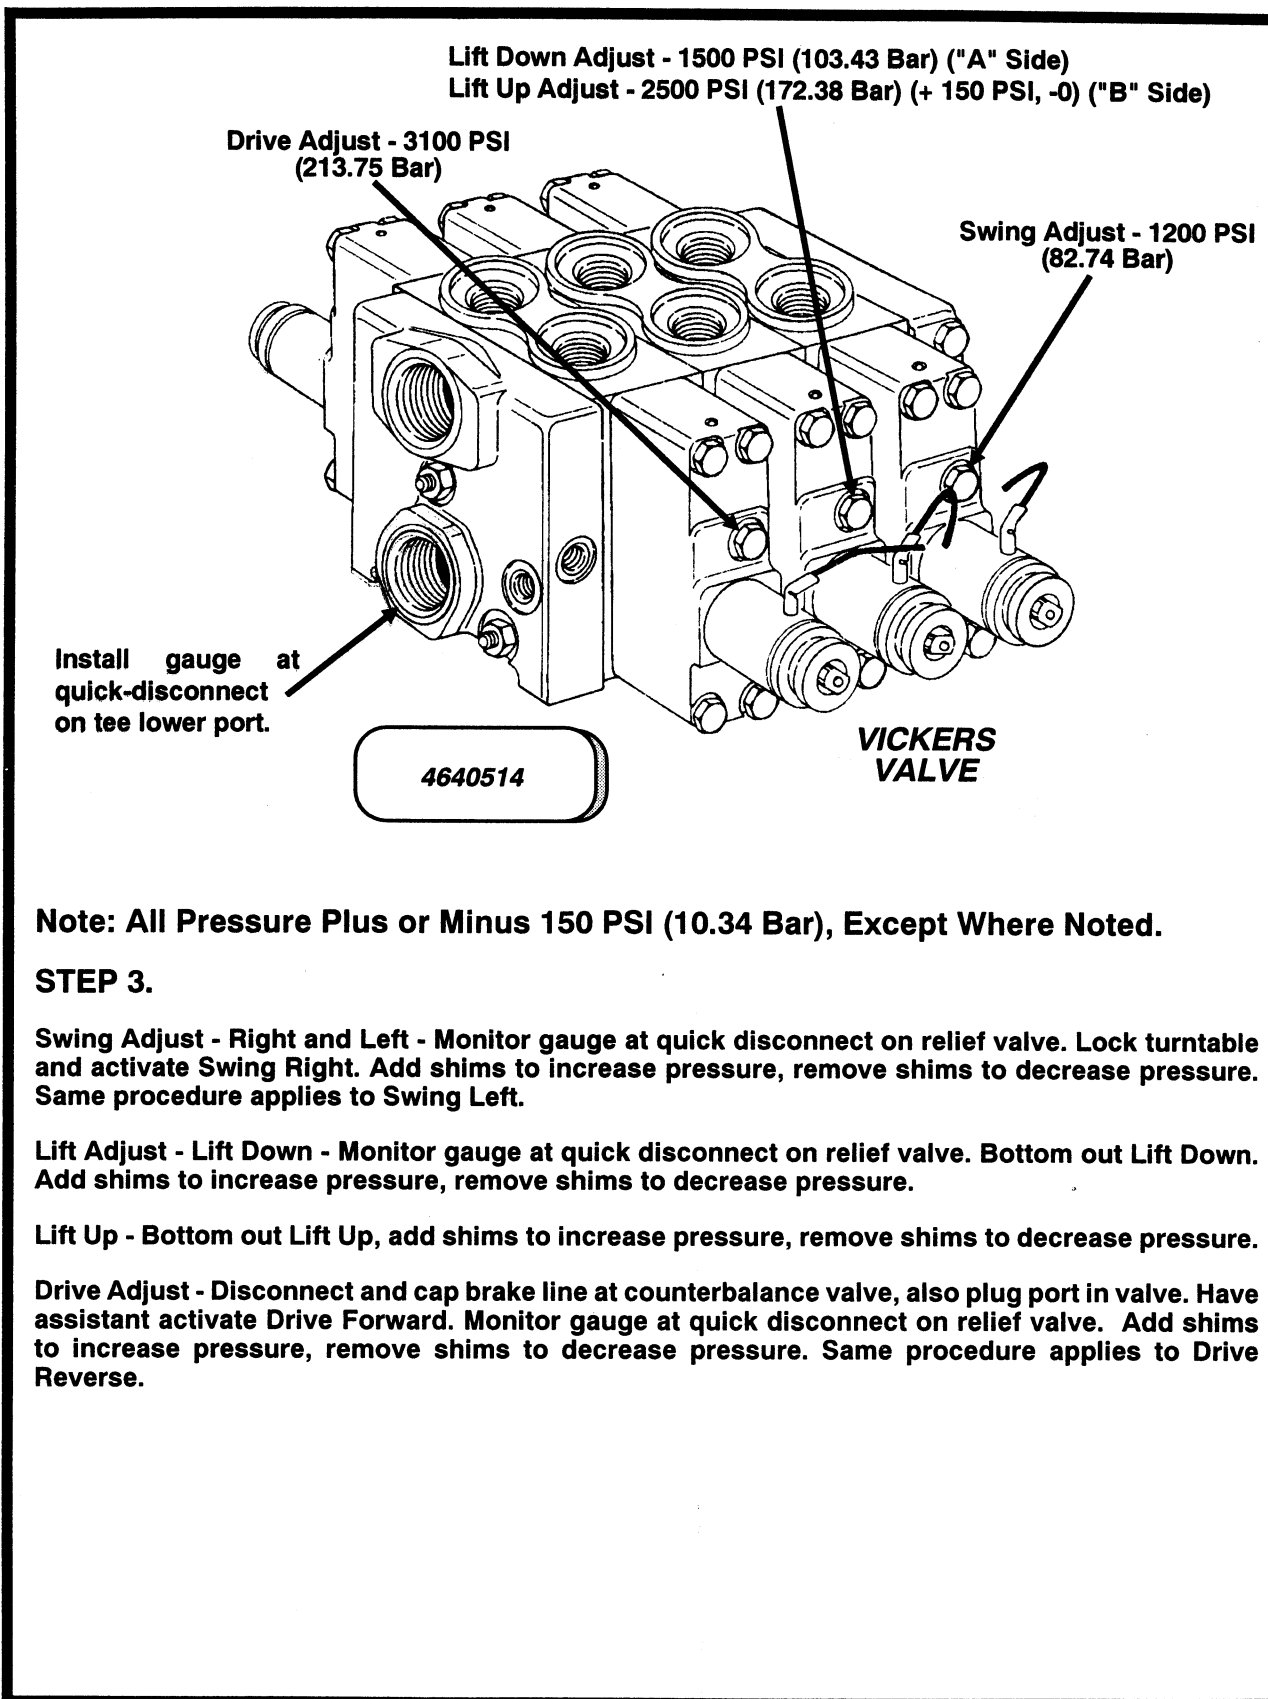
Vickers Proportional Valve Pressure Setting, Machines Built Prior To 1989 With Accessory Valve (Sheet 3 of 4).
